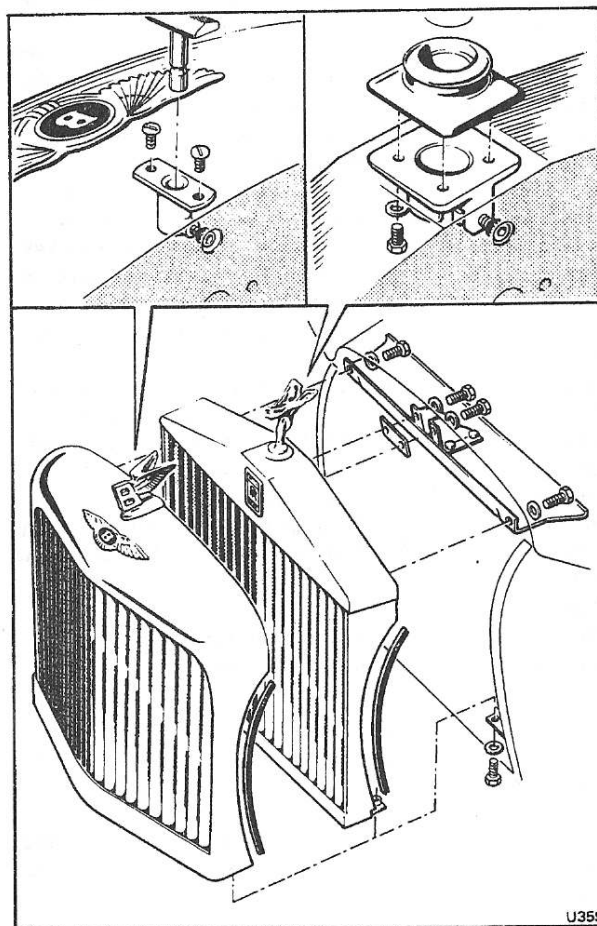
Rolls-Royce and Bentley radiator shells and fittings
